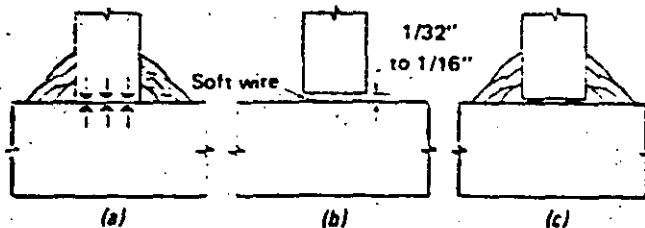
In a restrained joint in thick plates (a), all shrinkage stress must be taken up in the weld. Separating the plates with soft wires (b) allows the plates to move slightly during cooling. The wires flatten (c) and remove most of the stress from the weld metal.
